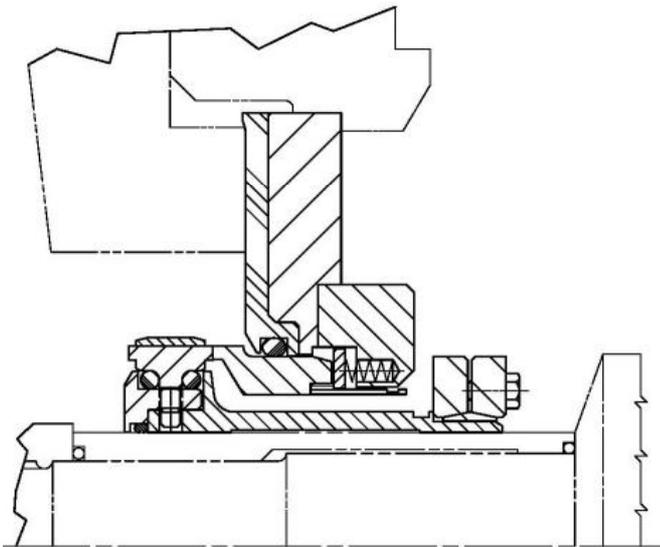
Heavy-duty slurry seal with elastomeric liner
